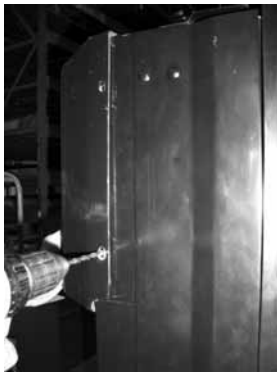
Use a 1/4" (6 mm) bit to drill holes for the trim as shown. Drill as closely as possible to the center of the slots in the sign.
